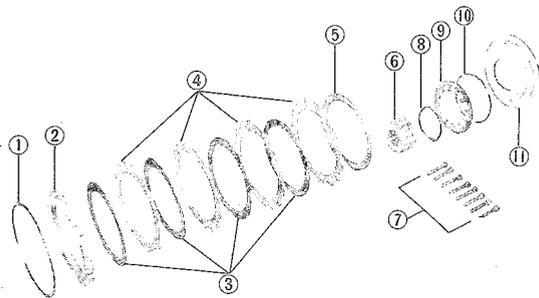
B-33 Fig. 7B-33 Low and reverse brake
